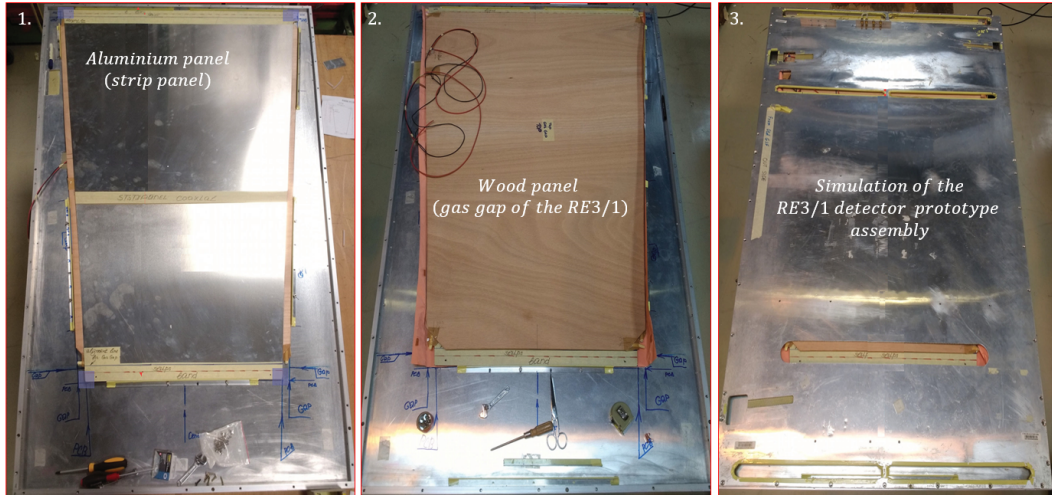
Simulation of the CMS-iRPC RE3/1 and RE4/1 detector prototypes assembly by using low-cost materials: 1 - an aluminum panel simulated the readout strip panel; 2 - the wood panel imitating of top gas gap; 3 - view of completed iRPC detector prototype.
